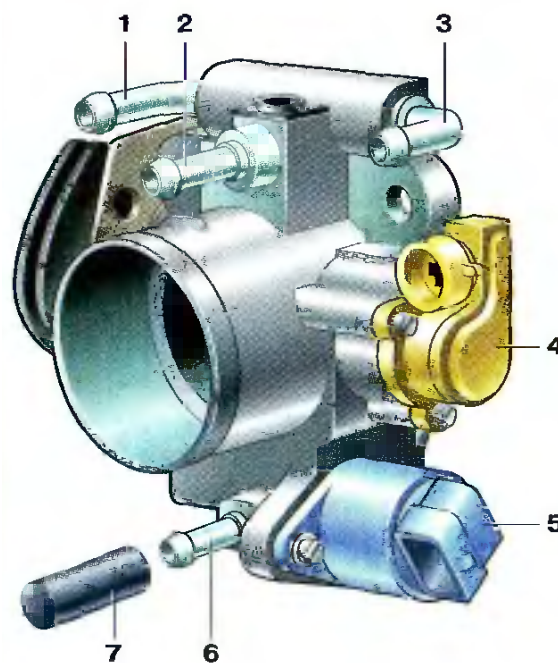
Throttle tube: 1 – cooling water inlet; 2 – branch pipe of the crankcase ventilation system at idle; 3 – cooling water outlet; 4 – choke (throttle) position sensor; 5 – idle speed regulator; 6 – nozzle for blowing out the adsorber; 7 – plug
